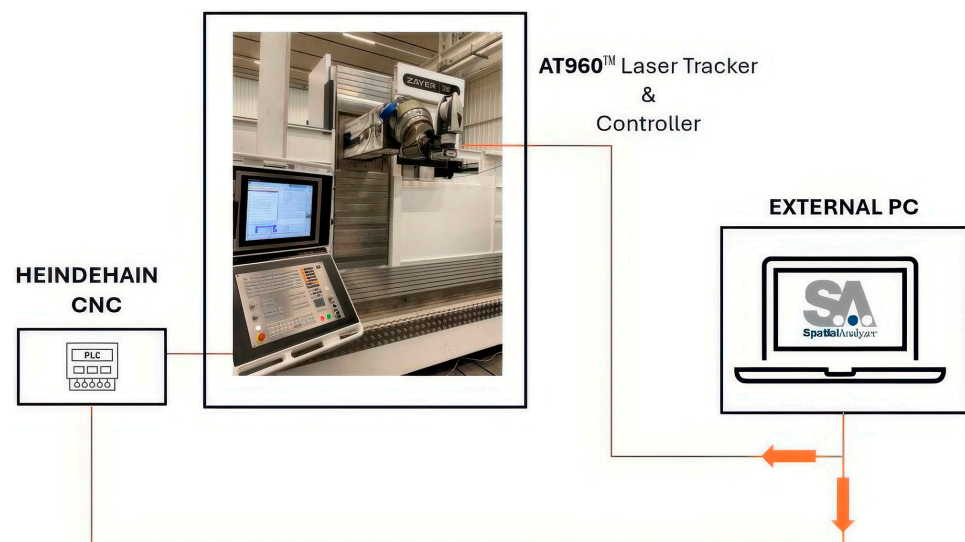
Connection setup between the laser tracker and machine tool controllers.
